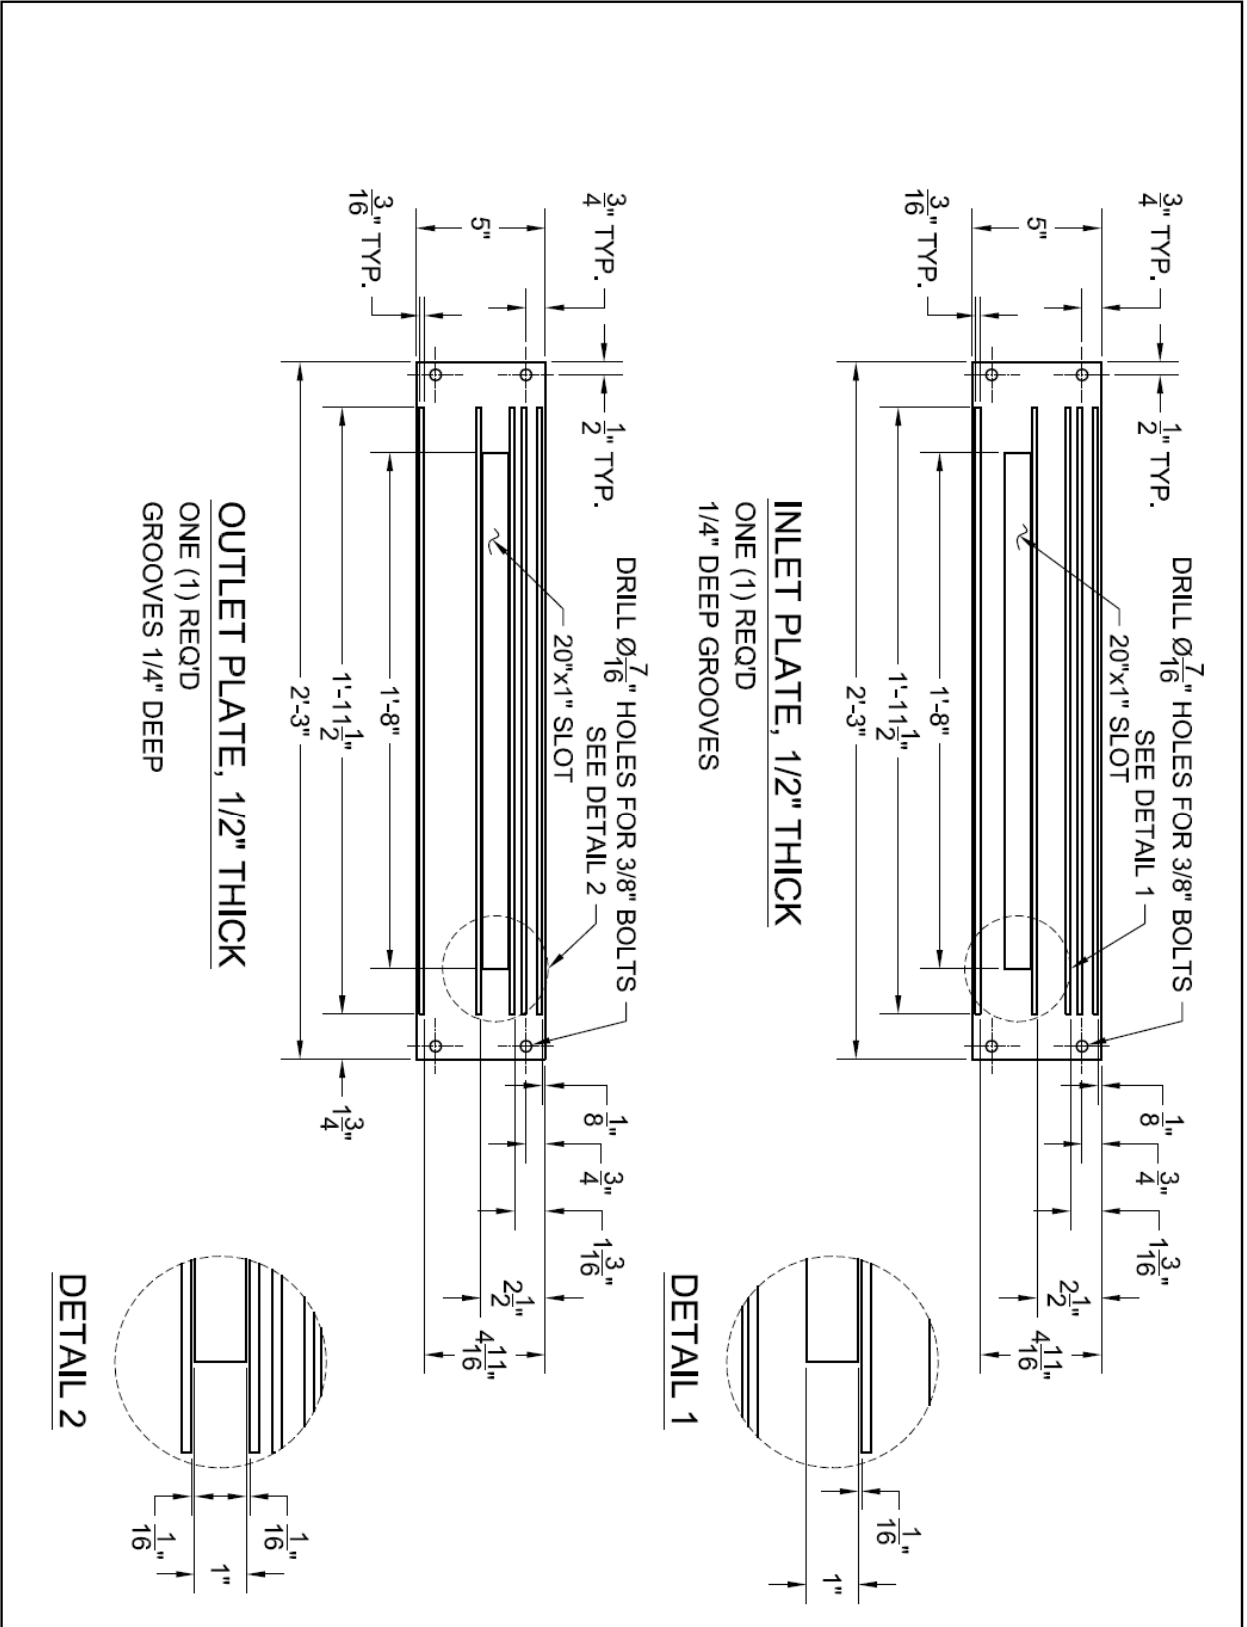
COLLECTOR FRAME INLET AND OUTLET PLATE DETAIL
